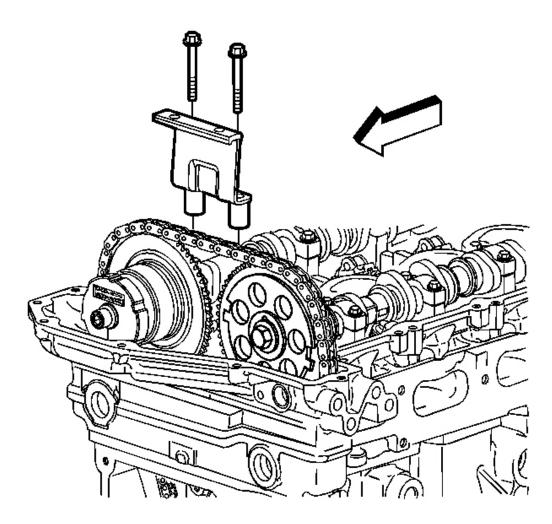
View Of Top Chain Guide Courtesy of GENERAL MOTORS CORP.
